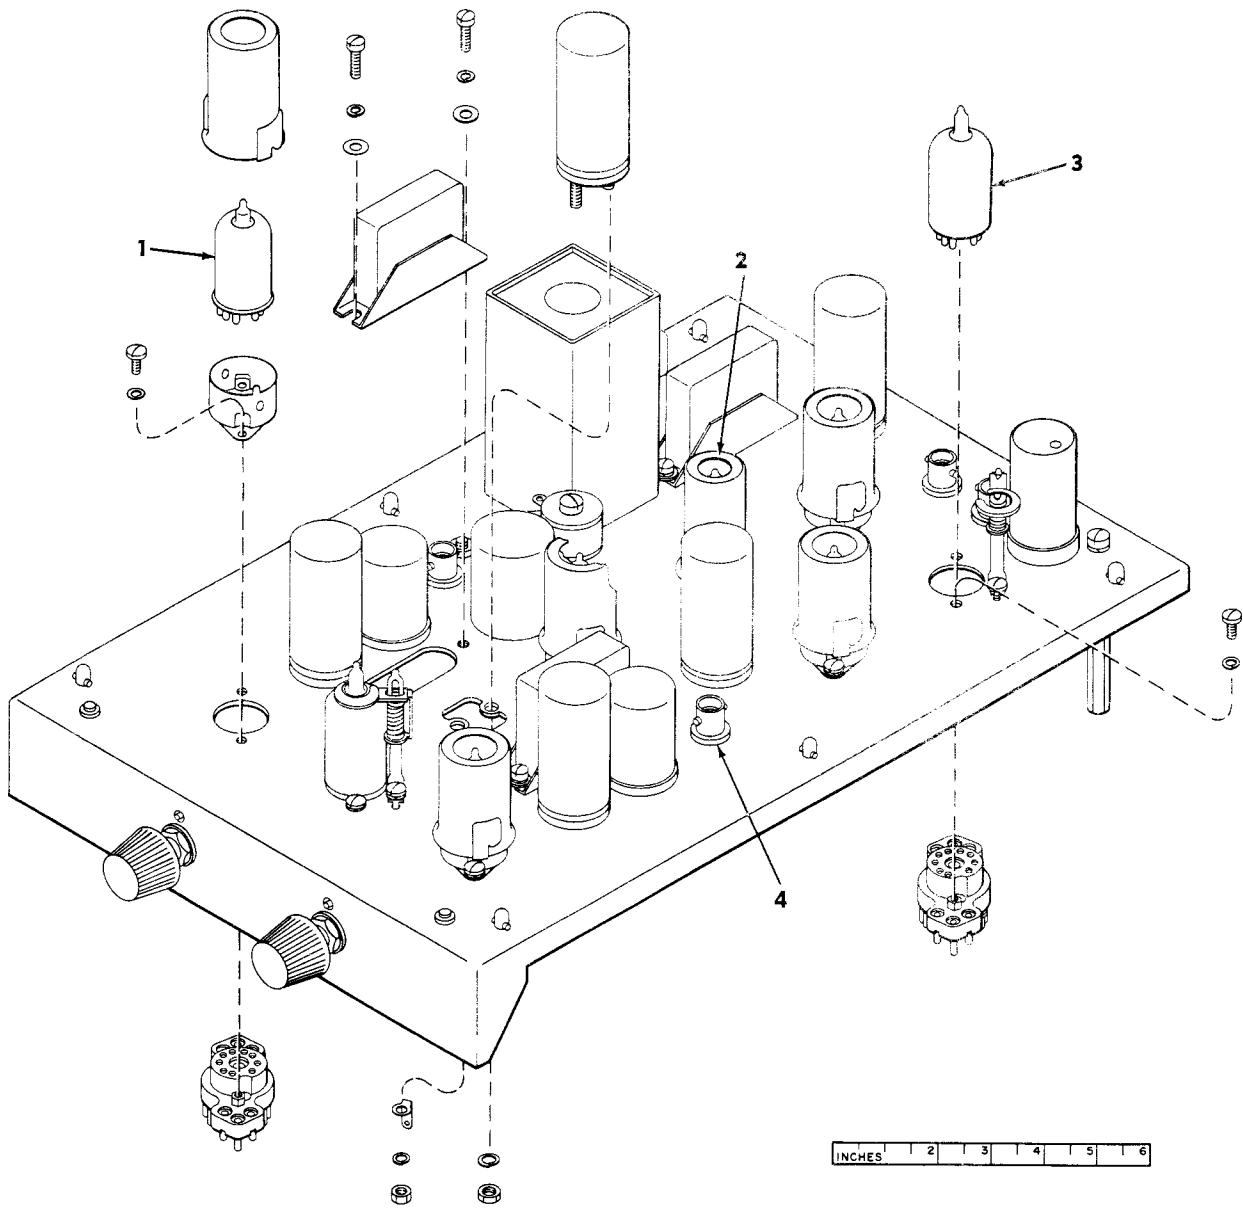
Generator assembly, pulse (9143996)–partial exploded view
